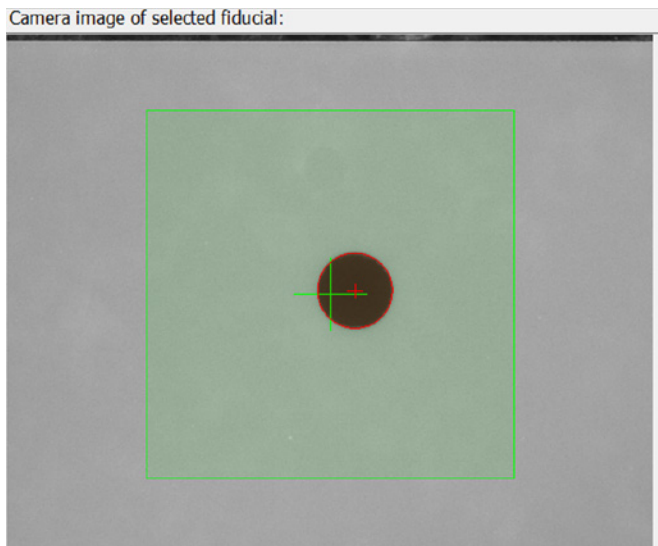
Inner layer alignment fiducial, exposed by UV markers in the table during top side exposure, and recognized by CCD camera alignment during the bottom side exposure.
